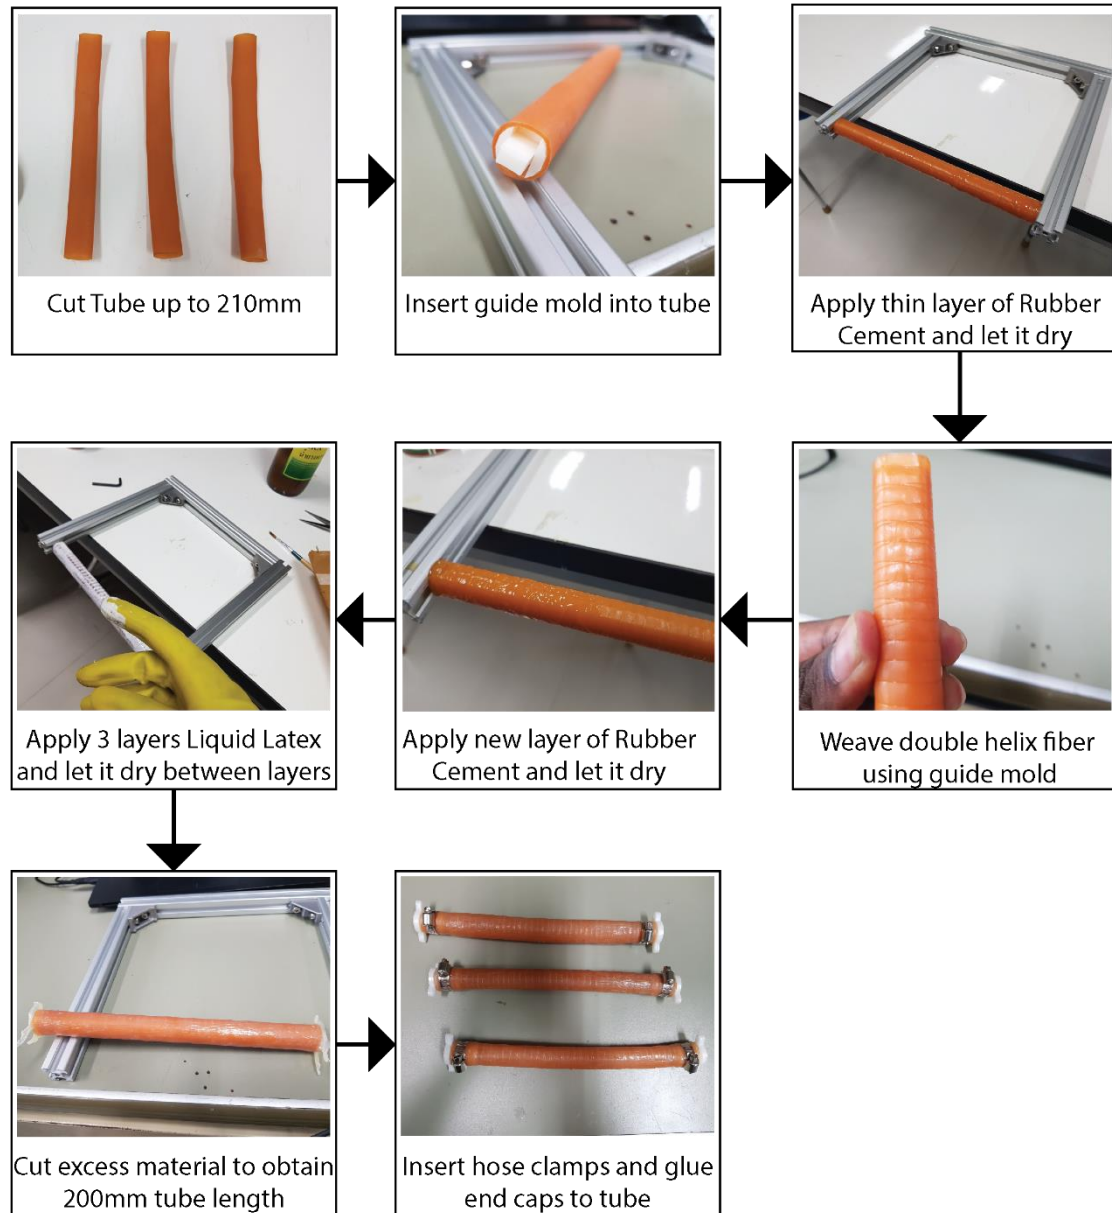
depicts the flowchart indicating the fabrication process. The process begins with cutting the tube with at least 210mm length. Thereafter, a 3D printed mold guide was inserted into the tube piece by piece. Figure 3.24 depicts the exploded view of the mold design along with the 3D printed parts. This mold was designed as 6 parts to ease the release process once the actuator is fabricated. If designed as one solid guide mold, the fiber constricts the tube, and the removal will damage the actuator. The mold was
